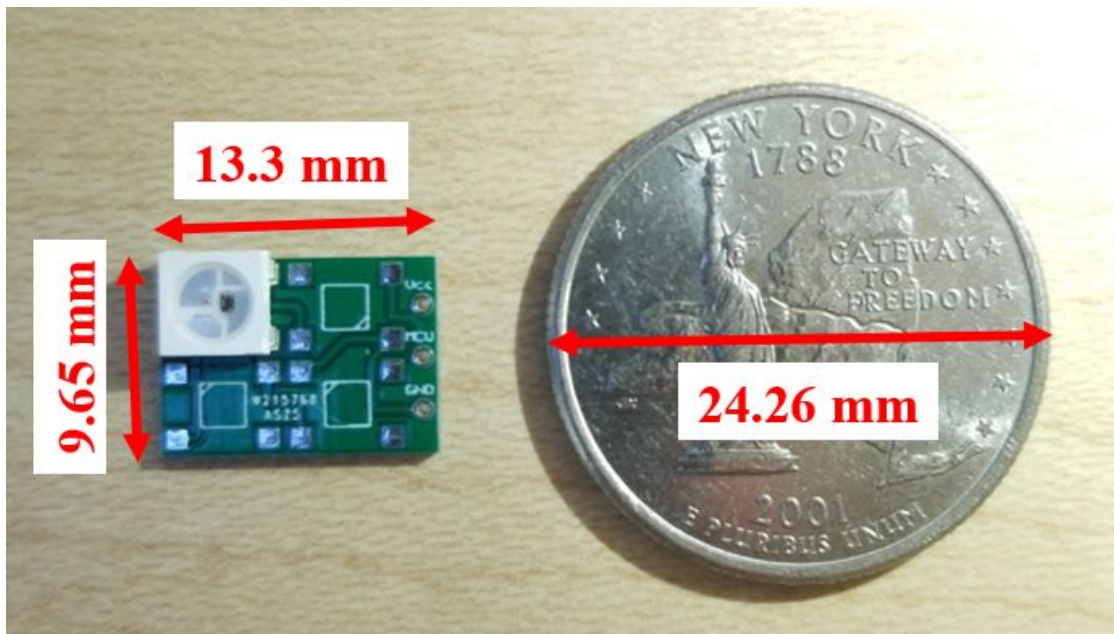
The final PCB was fabricated through PCBWay and is compared to the size of a quarter.
